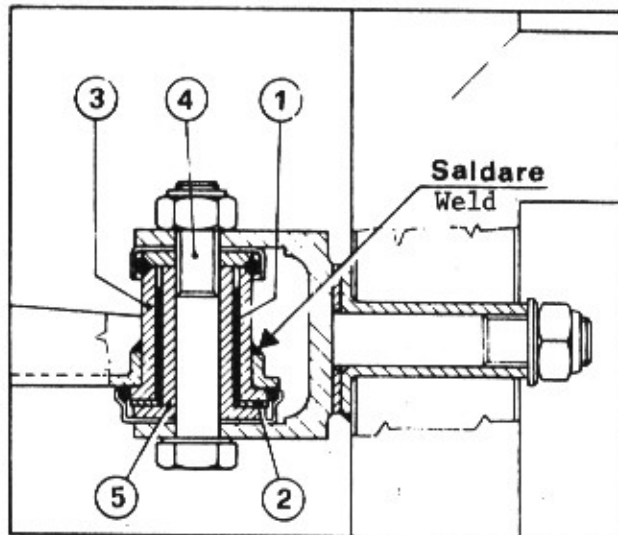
Side View of Oscillating Arms to Chassis Attachment Bushings
